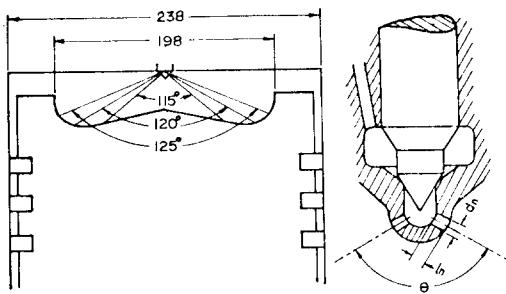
Sectional view of combustion chamber and nozzle in tested engine.
